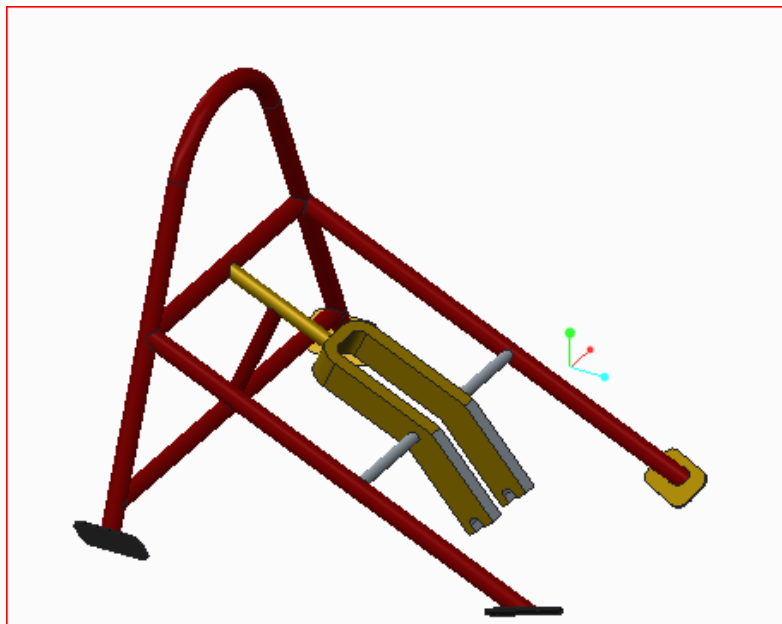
ROLL BAR AND REAR WHEEL MOUNT
